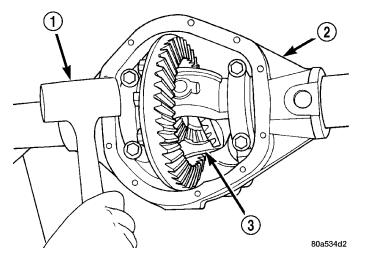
SEAT DUMMY BEARING PINION GEAR SIDE
